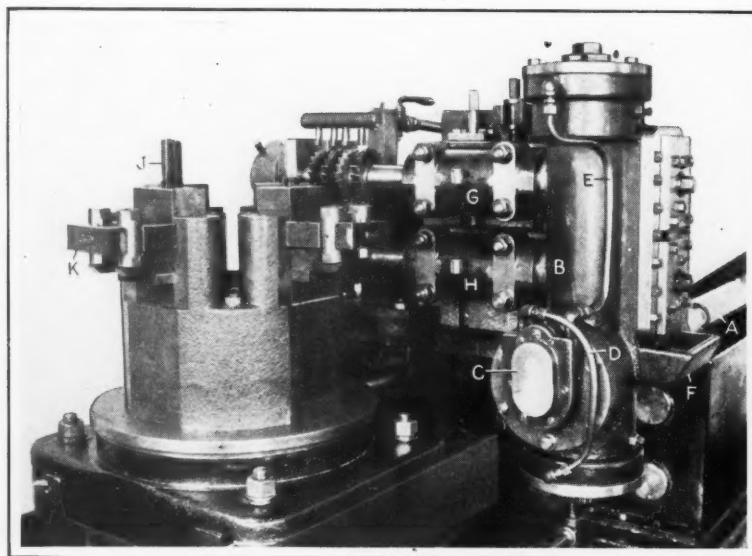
Bilton "Producto-Matic" with Two Cutter-spindles
